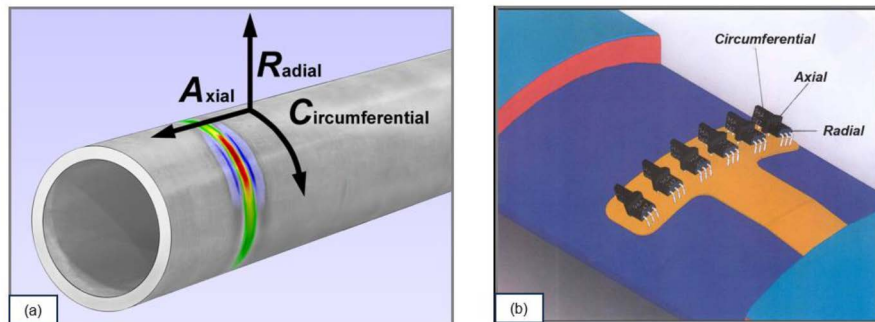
(a) FL sensors on MFL inspection tool is designed to acquire 3 axial components of the magnetic flux leakage created by metal collars and defects on casing wall; (b) Tri-axial FL sensors placed on the MFL inspection tool.
